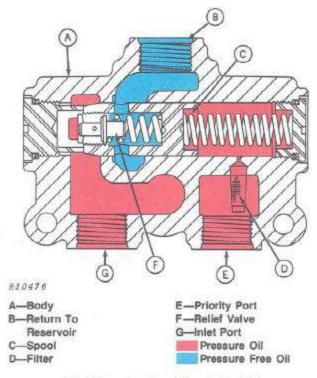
Cross-Section of Flow Control Valve Showing Relief Valve
